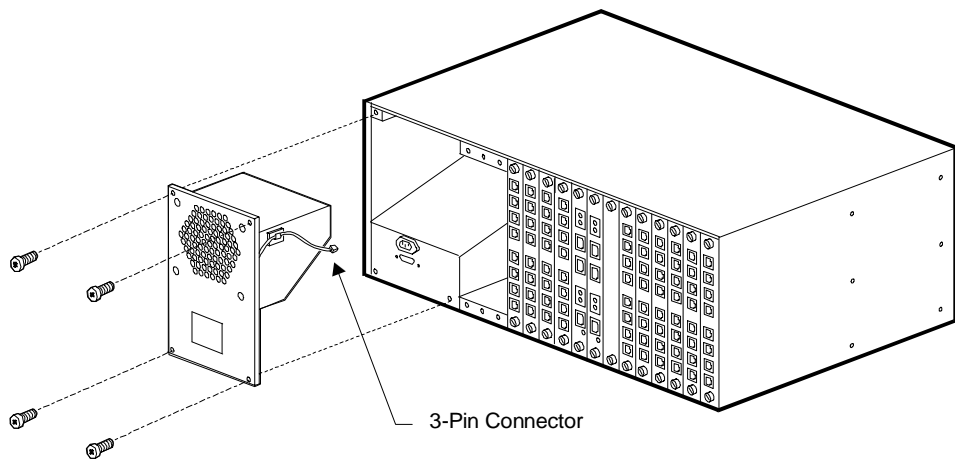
Removing the 3-Pin Connector and Metal Plate
